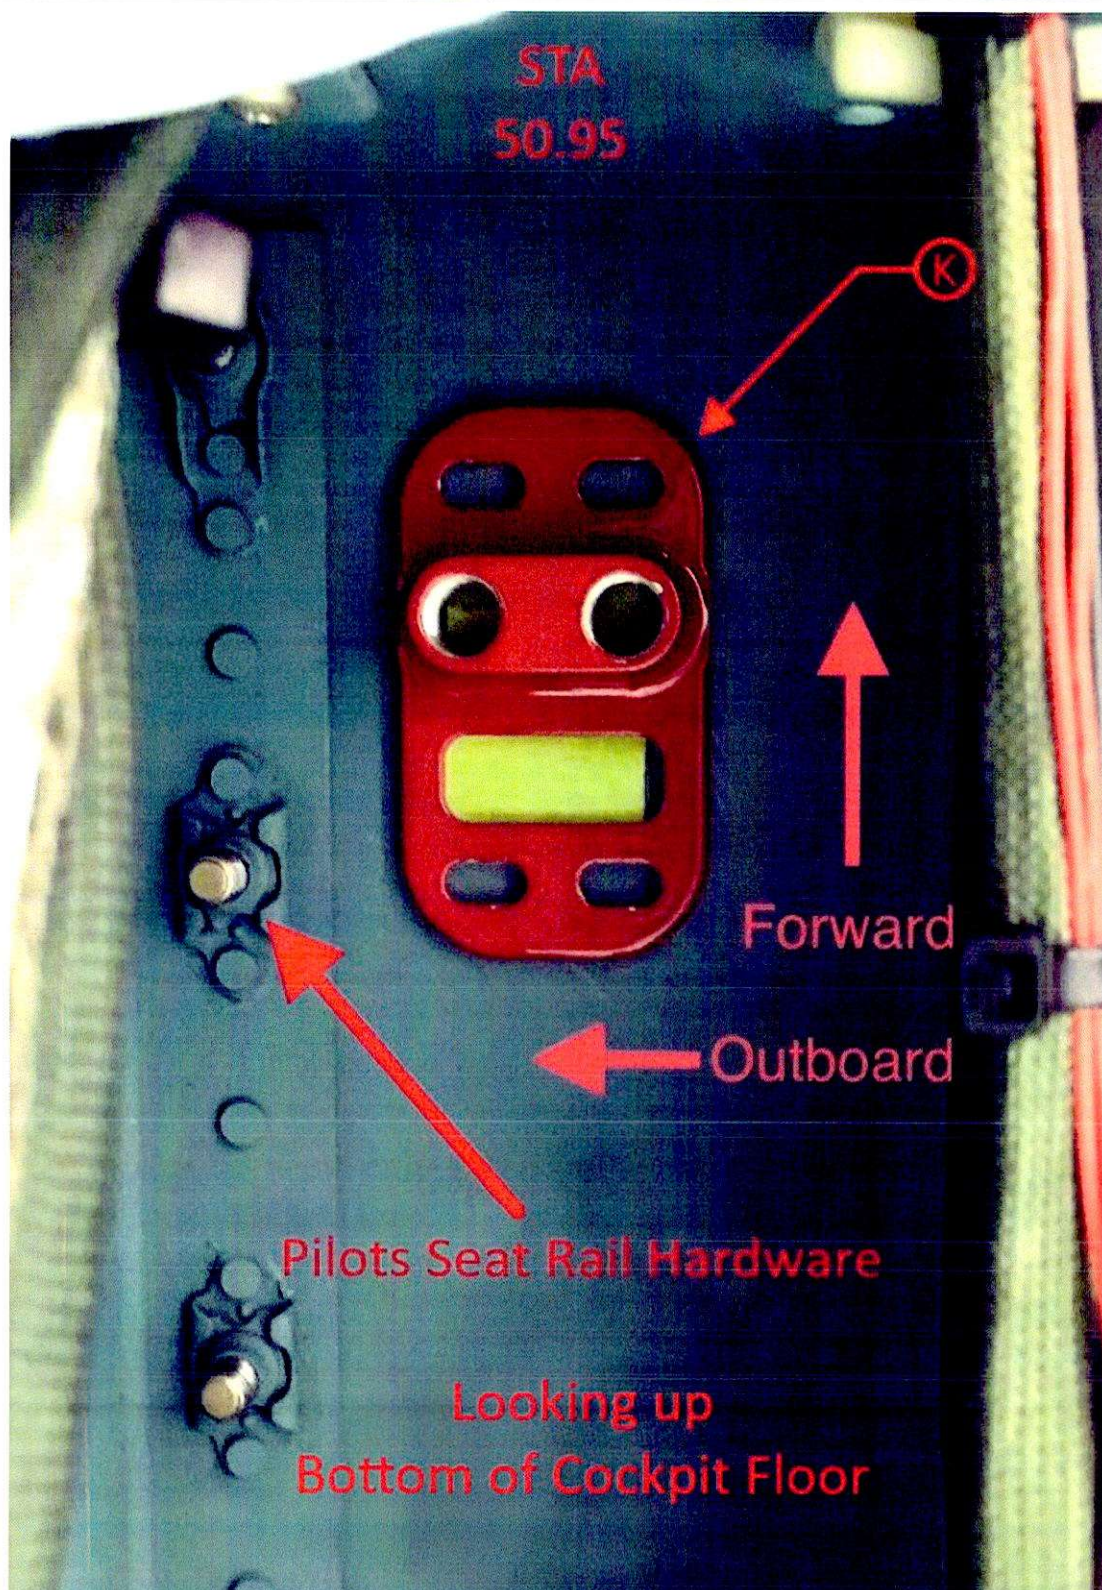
UNDER COCKPIT FLOOR LOOKING UP
